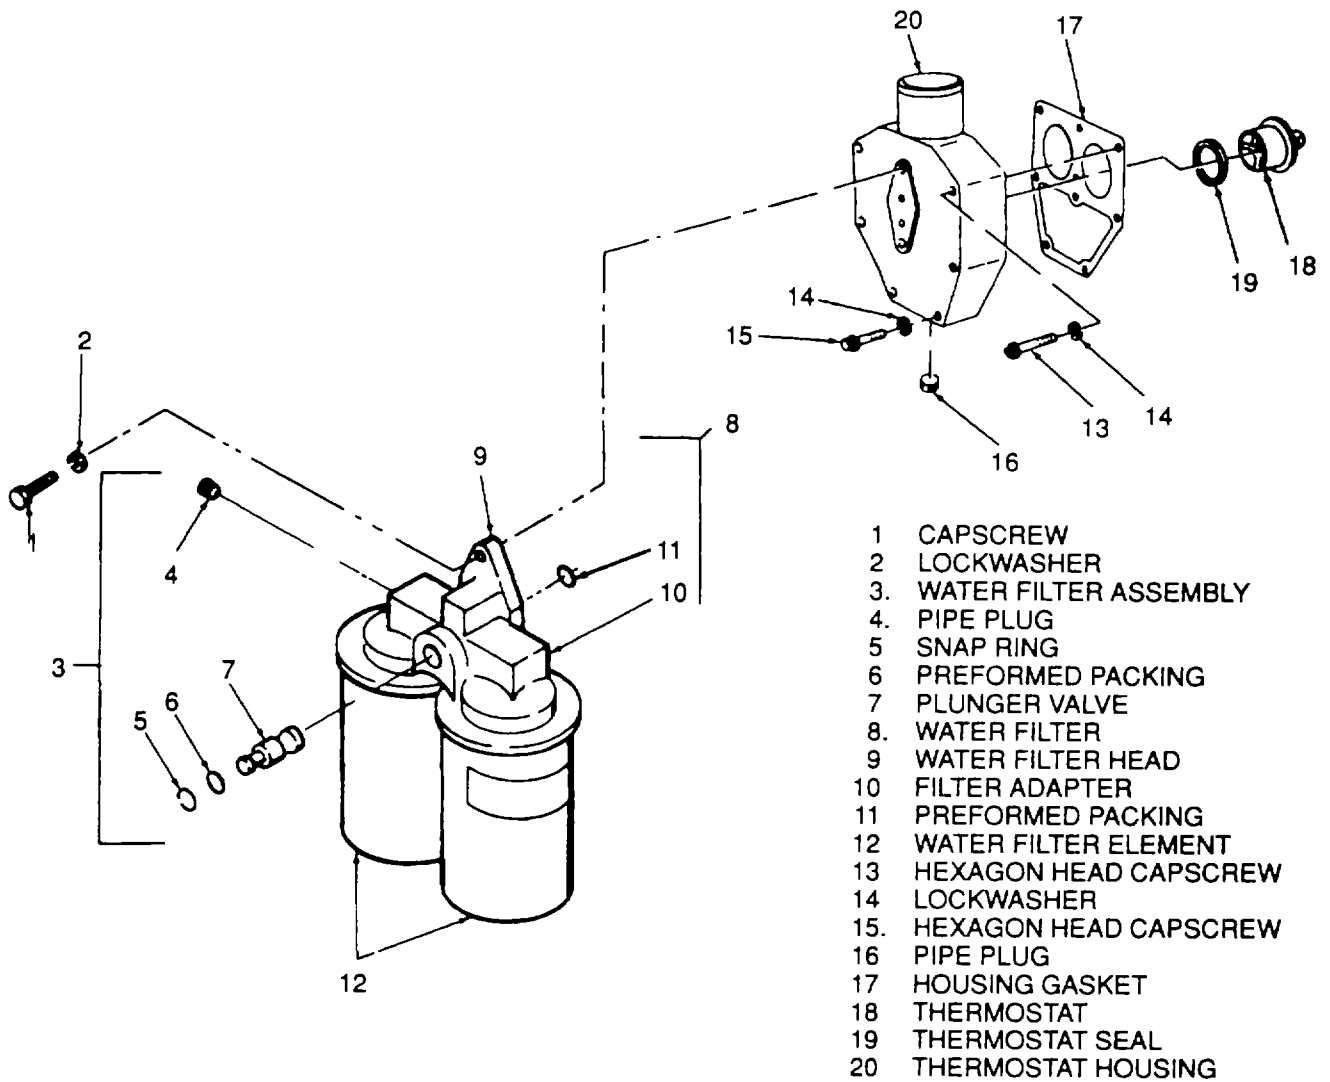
Water Filter Assembly and Coolant Thermostat
